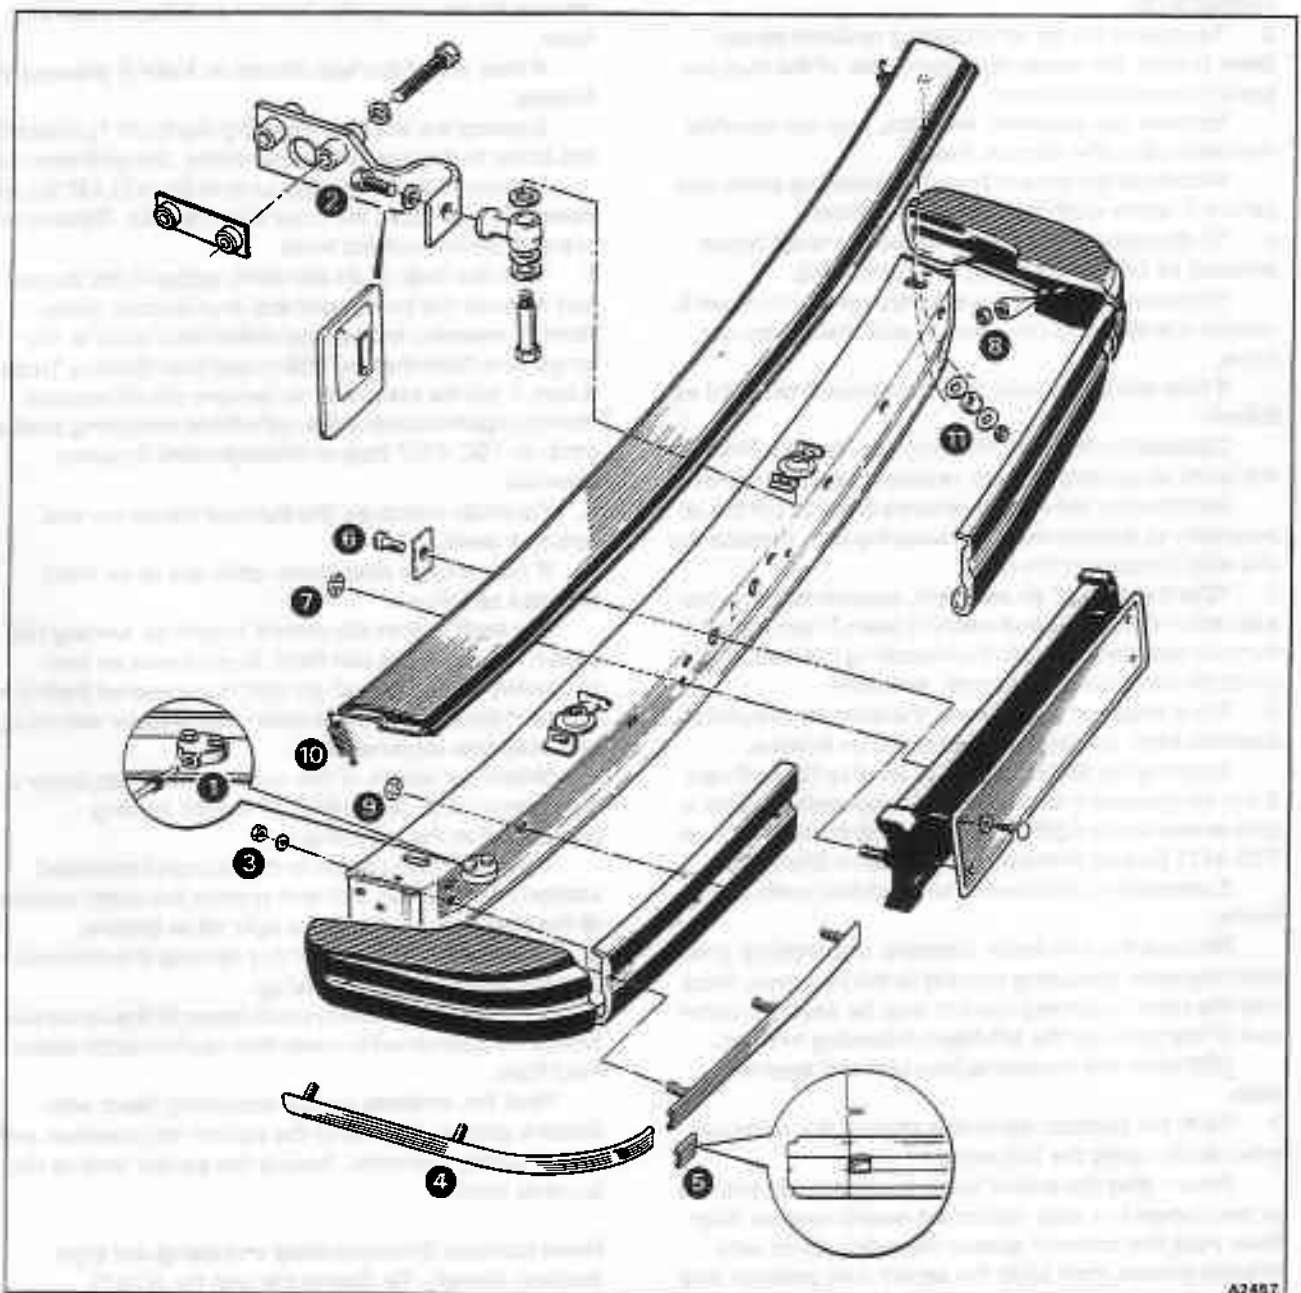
Front bumper assembly (incorporating a rectangular type number plate)
